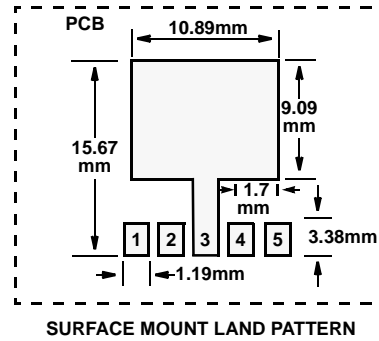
B. SURFACE MOUNTING OF HIP2060 ARRAY PACKAGE TO THE HEAT SINK
